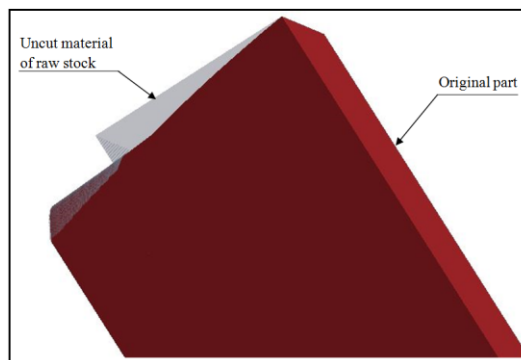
Visual verification of part 1 using 3-axis machining simulation.
